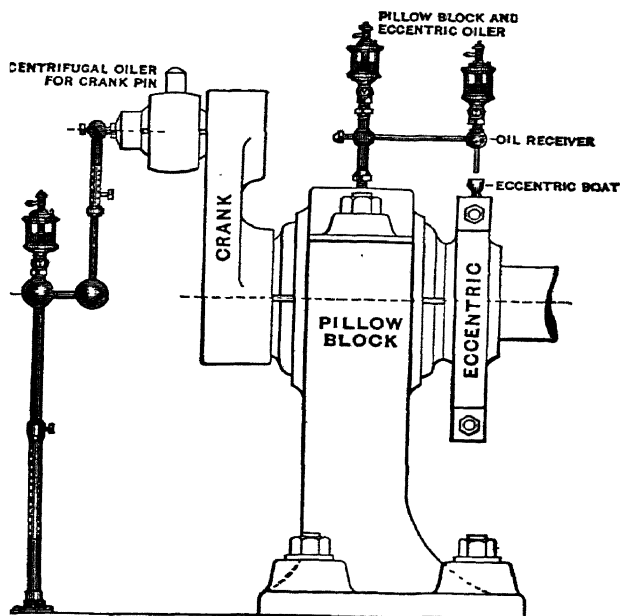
Oiling system for main bearing and eccentric of a steam engine.
